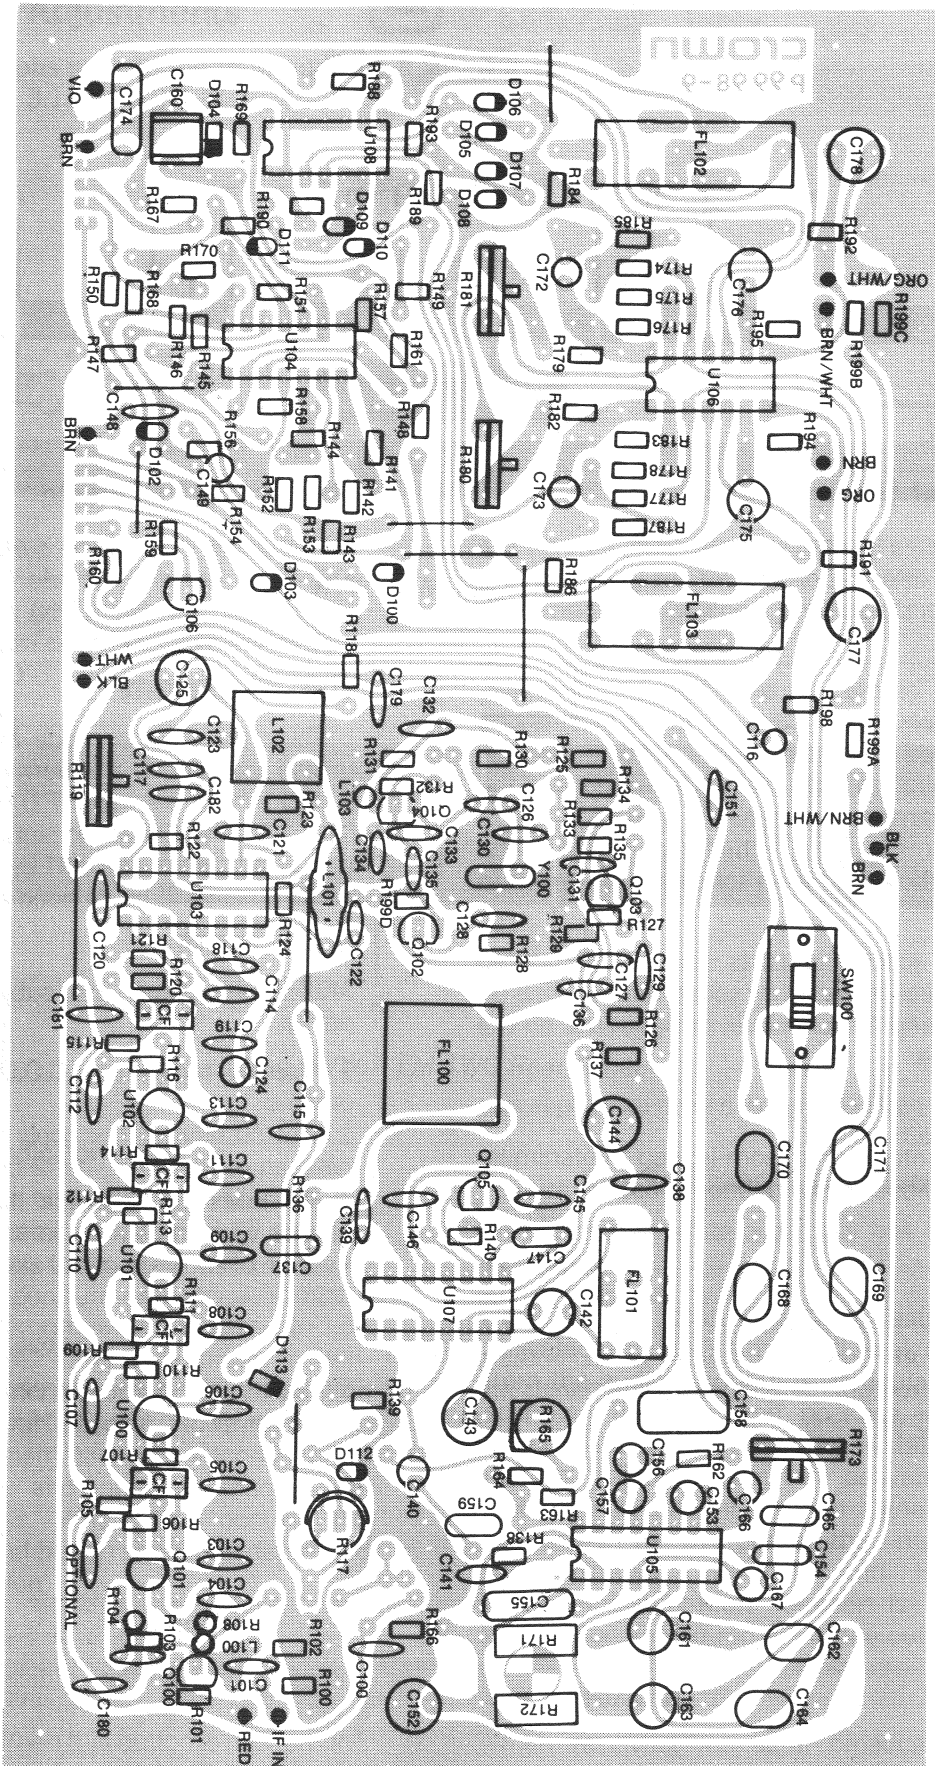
Main Module Component Board Layout; #Q42467J2
